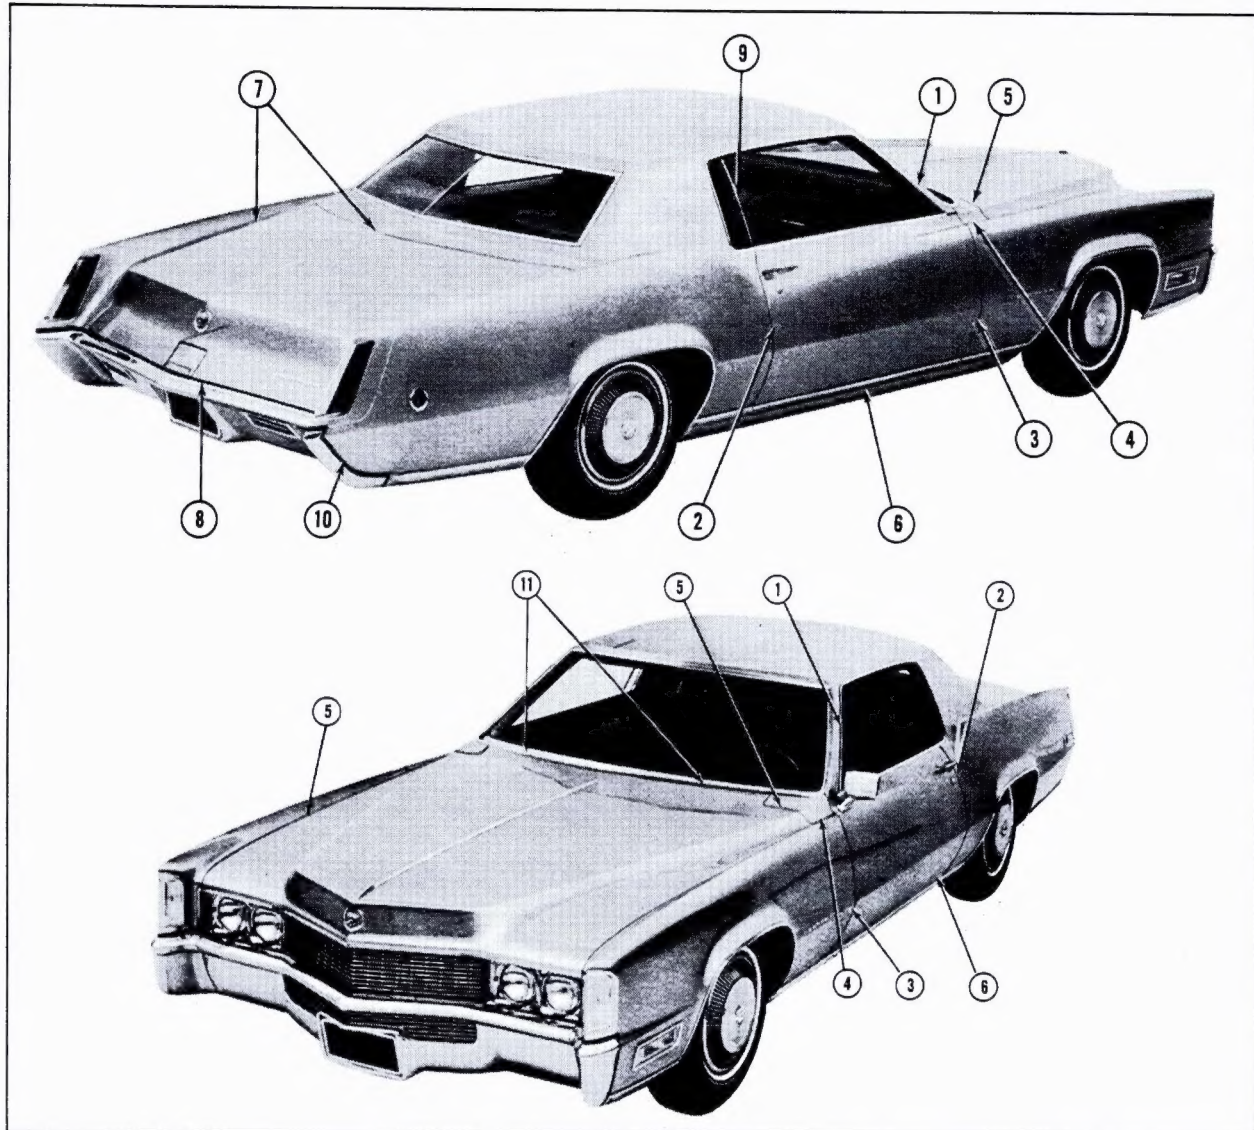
Sheet Metal Tolerances - 693
